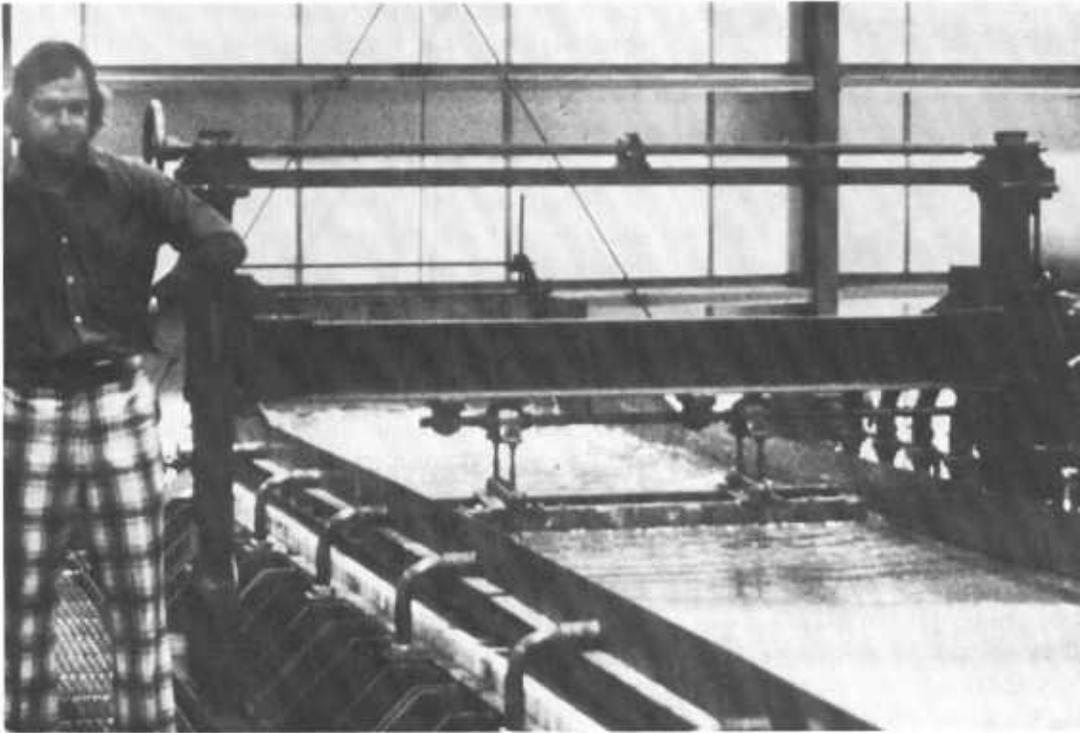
Wet line on Fourdrinier forming machine (Edge Wallboard).
